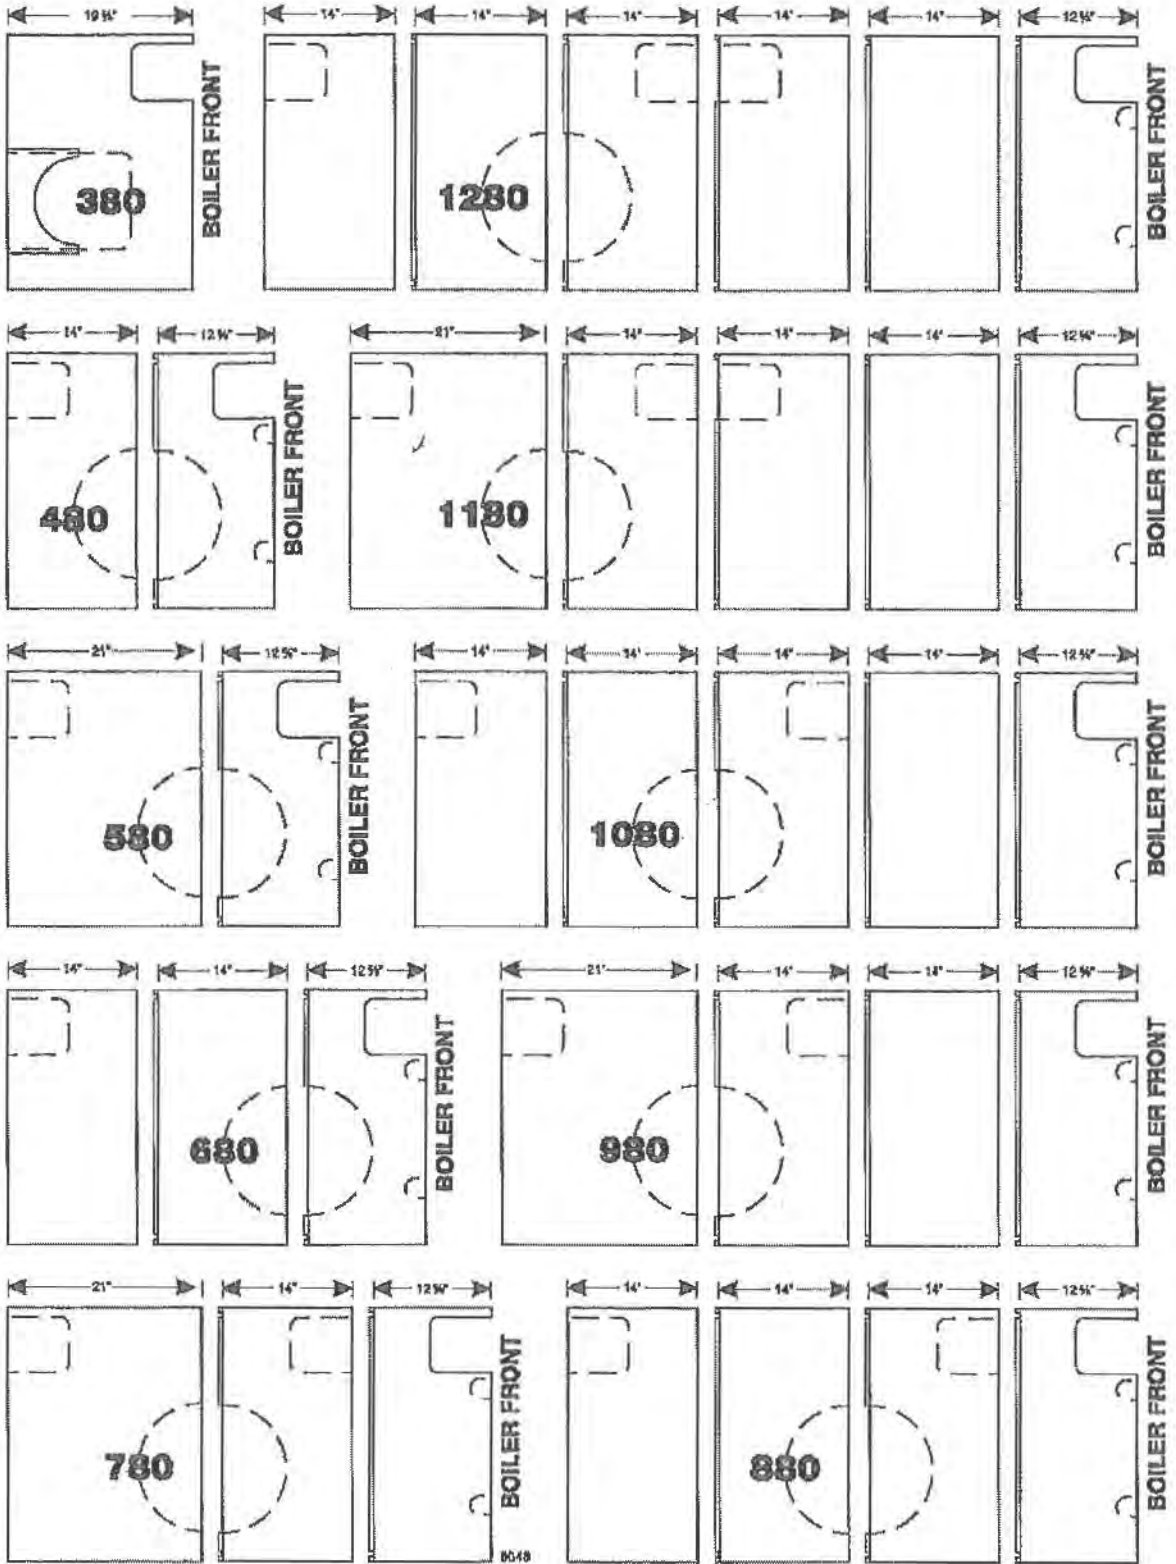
Jacket side panel placement — Models 1080, 1180, and 1280
